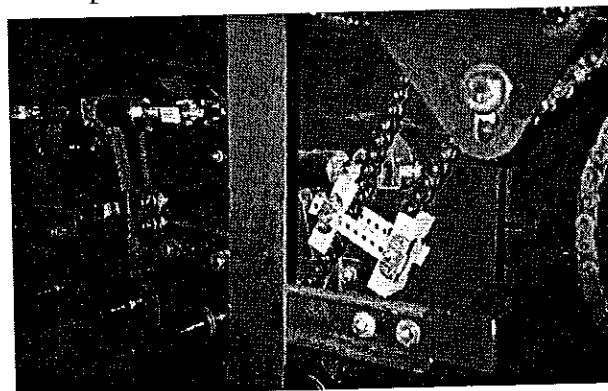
Snap Idler for Adjusting Drive Chain Tension of Optional Chain Bed.
